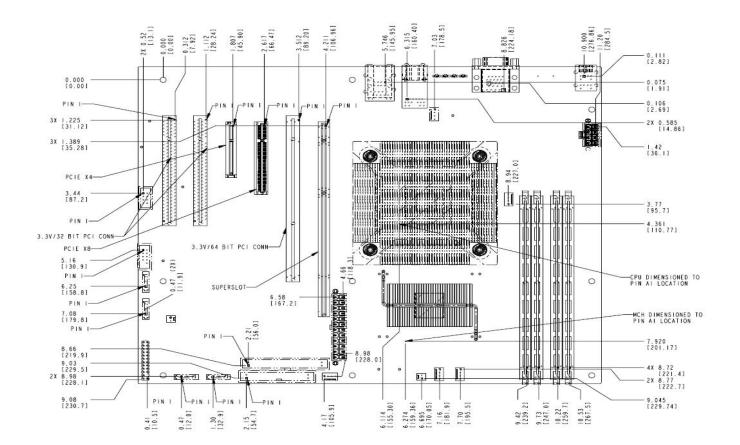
Intel[®] Server Board S3000AHLX – Hole and Component Positions (2 of 2)
